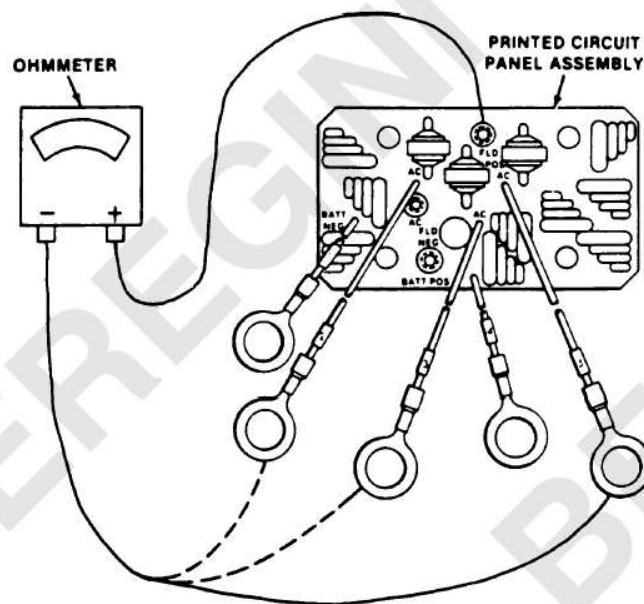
Shorted Printed Circuit Panel Assembly Diode Check.
